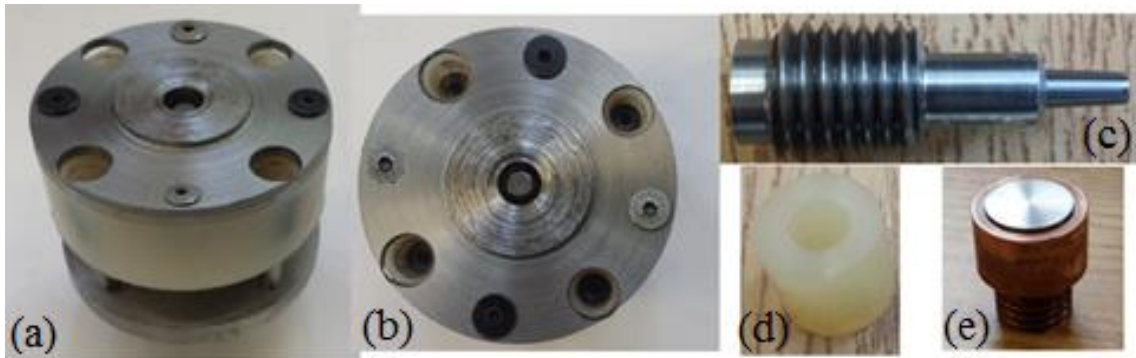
Photographs of die-less clinching tools in the present study; (a) and (b) tooling assembly, (c) punch, (d) polymeric spring, and (e) flat anvil.
